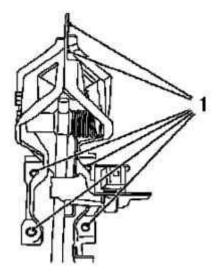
Bolt fastening the brake pedal: 1 - bolts, 2 - screw fixing
